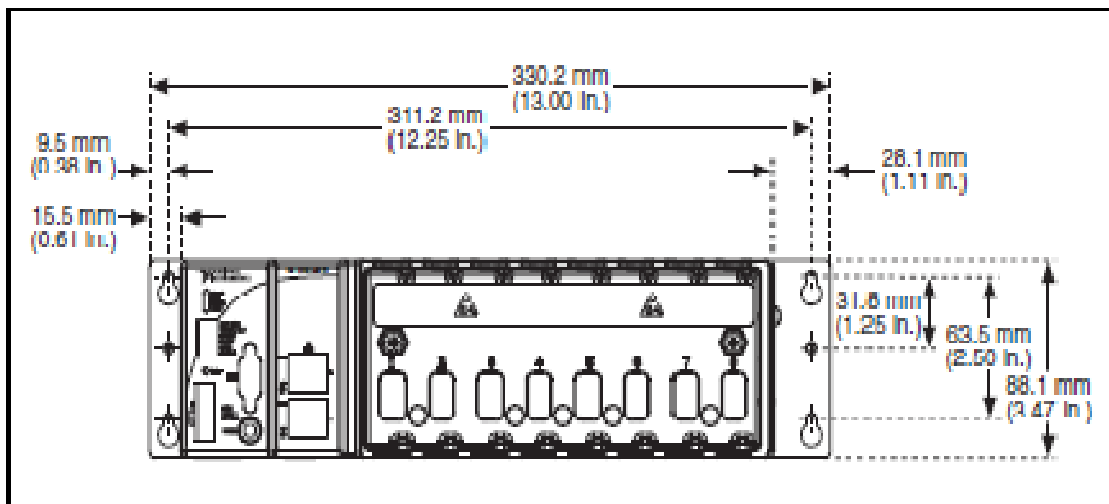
Dimensions of cRIO-9072/3/4 with Panel Mount Accessory installed
